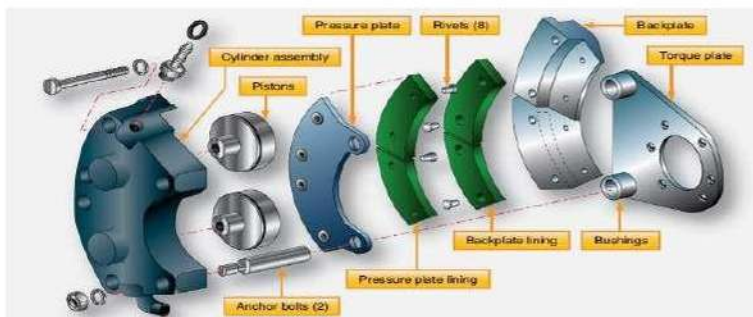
An exploded view of a dual-piston Cleveland brake assembly.
